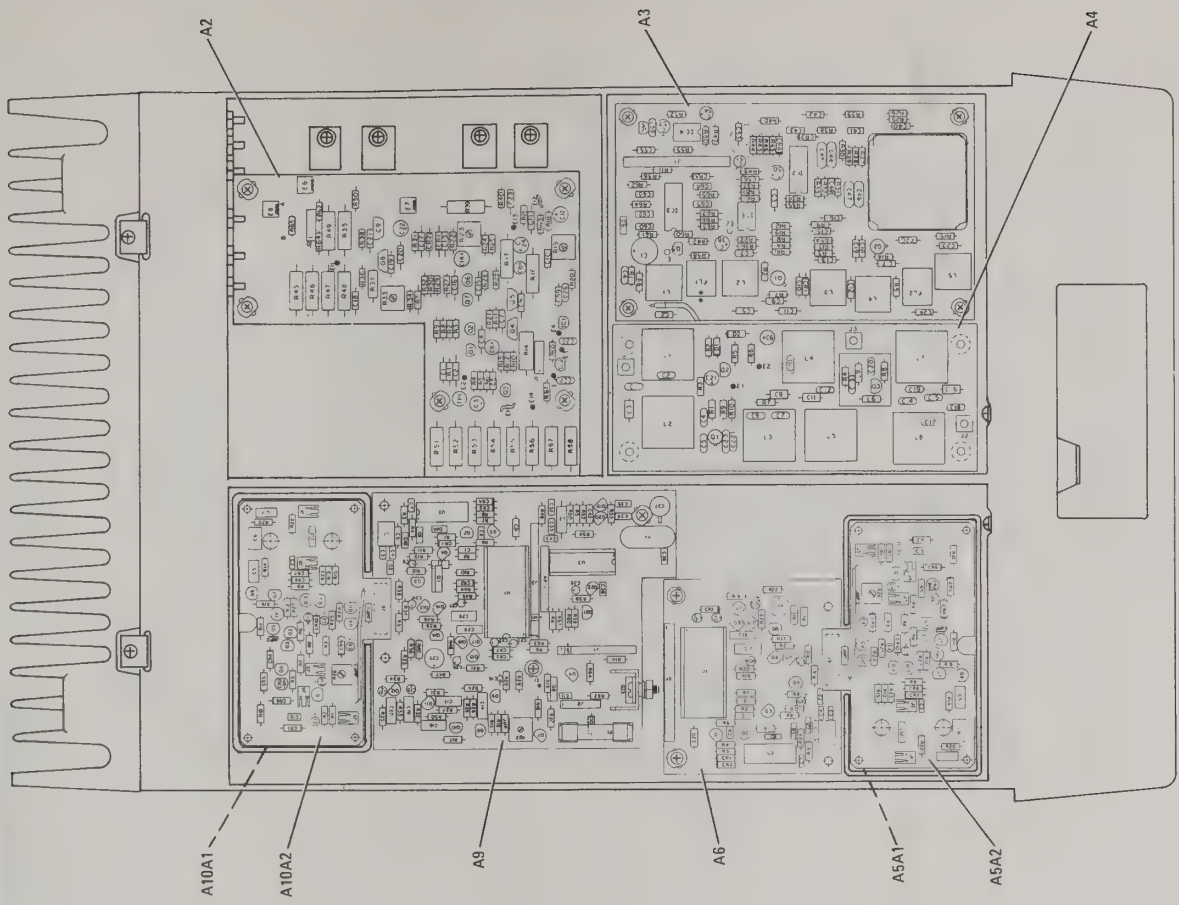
VHF Transceiver, Modules and Board Assemblies
